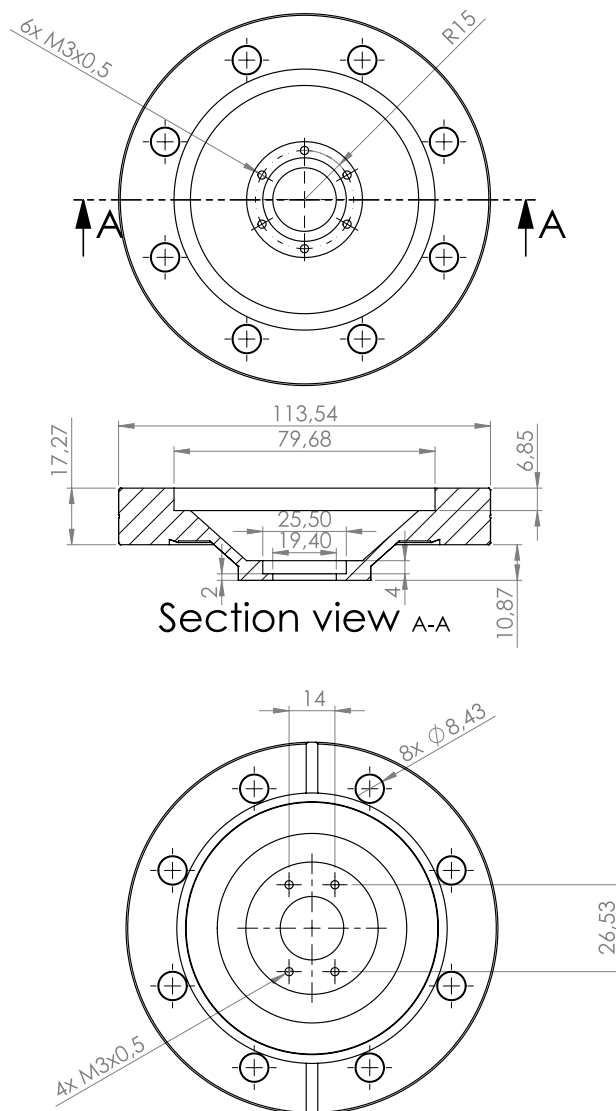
Technical drawing of the home-built CF63 viewports at the stainless steel science chamber. Dimensions are given in millimeter. Material: 1.4435/BN2.
